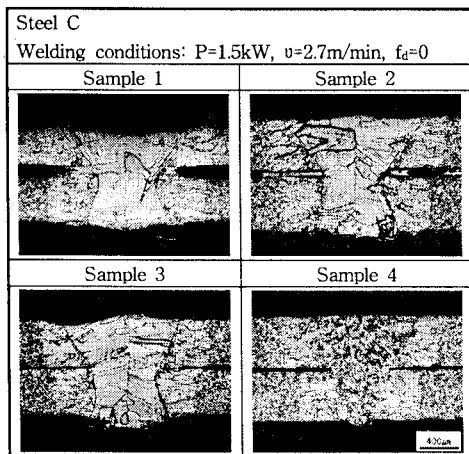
Weld cross-section of surface pre-treated specimens
